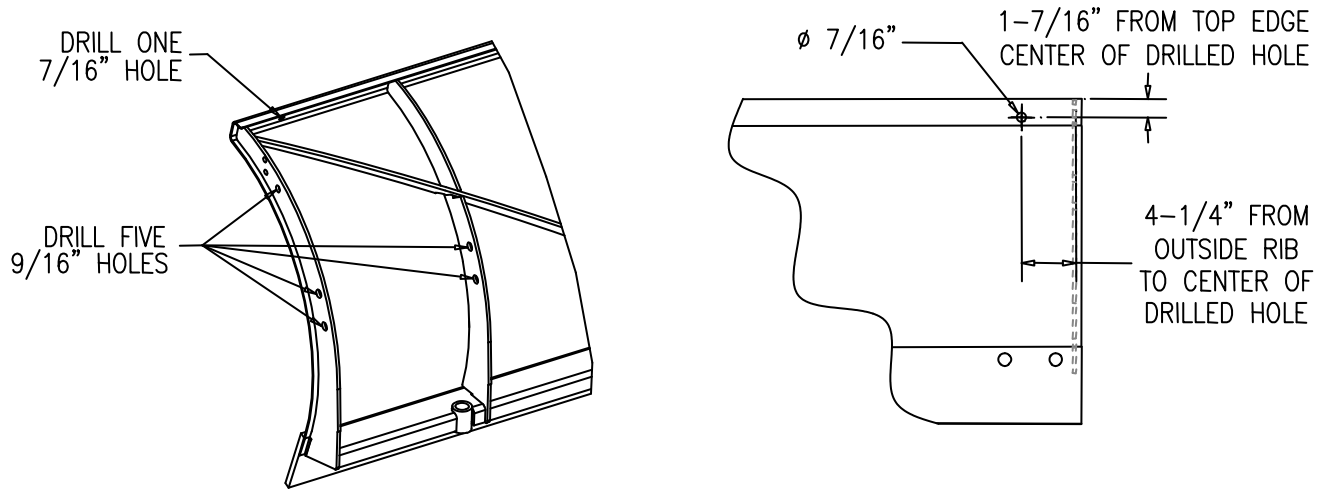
Blade Top Drilled Hole Measurements (POLY-V HOLES ARE PRE-CUT)
